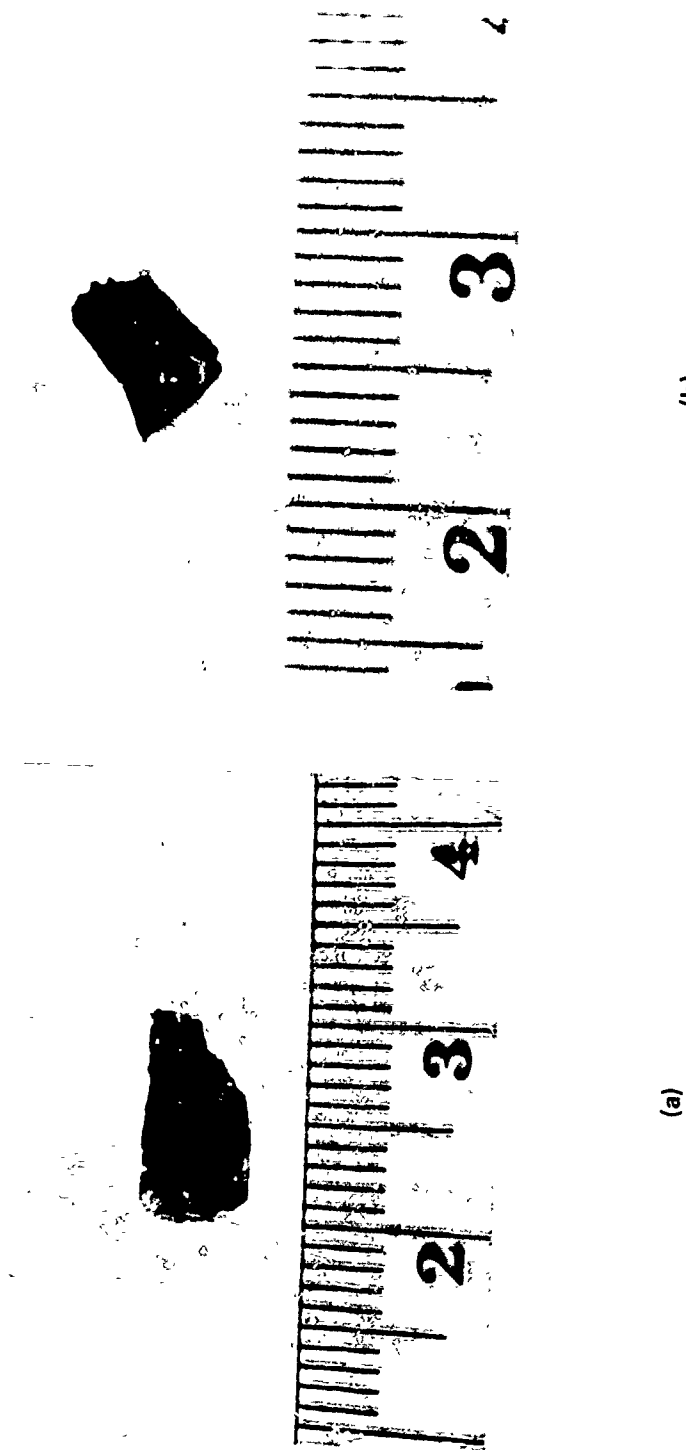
Type 4C HF-1 steel cylinder fragment with heat treatment B showing (a) shear fracture surfaces and (b) fragment end surface. Fragment mass: 12.9 gr (0.84 g).
